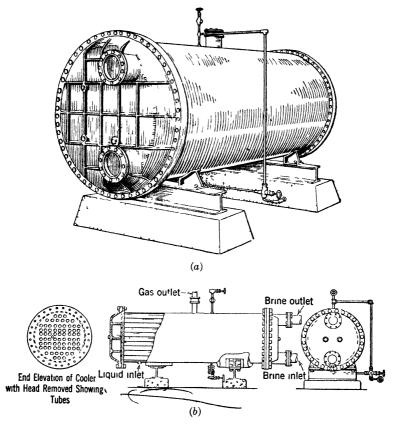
·5. The shell-and-tube brine cooler. (a) Isometric view. (b) Section of a cooler designed for eight passes.
